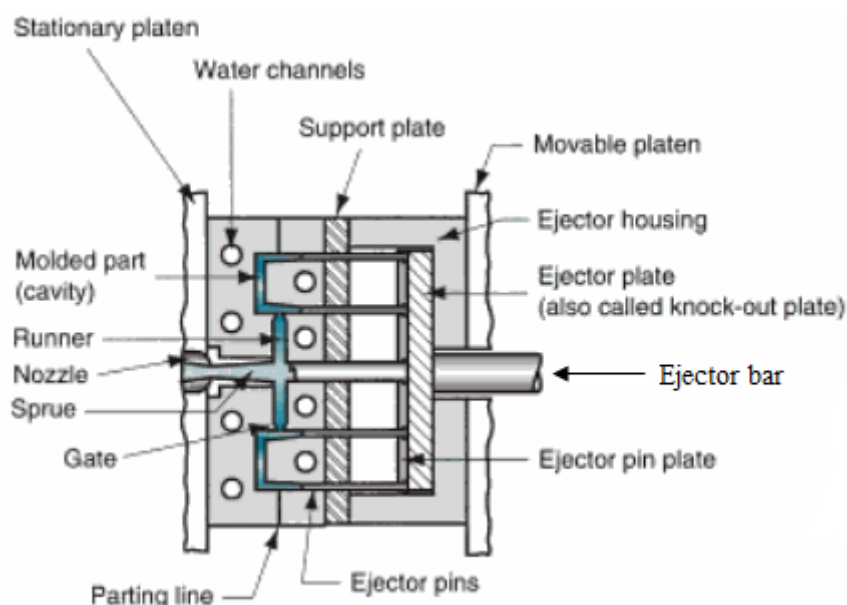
A closed two-plate mold. The mold has two cavities to produce two cup-shaped parts (cross-section shown here) with each injection shot. (Source: Groover, 2010)
